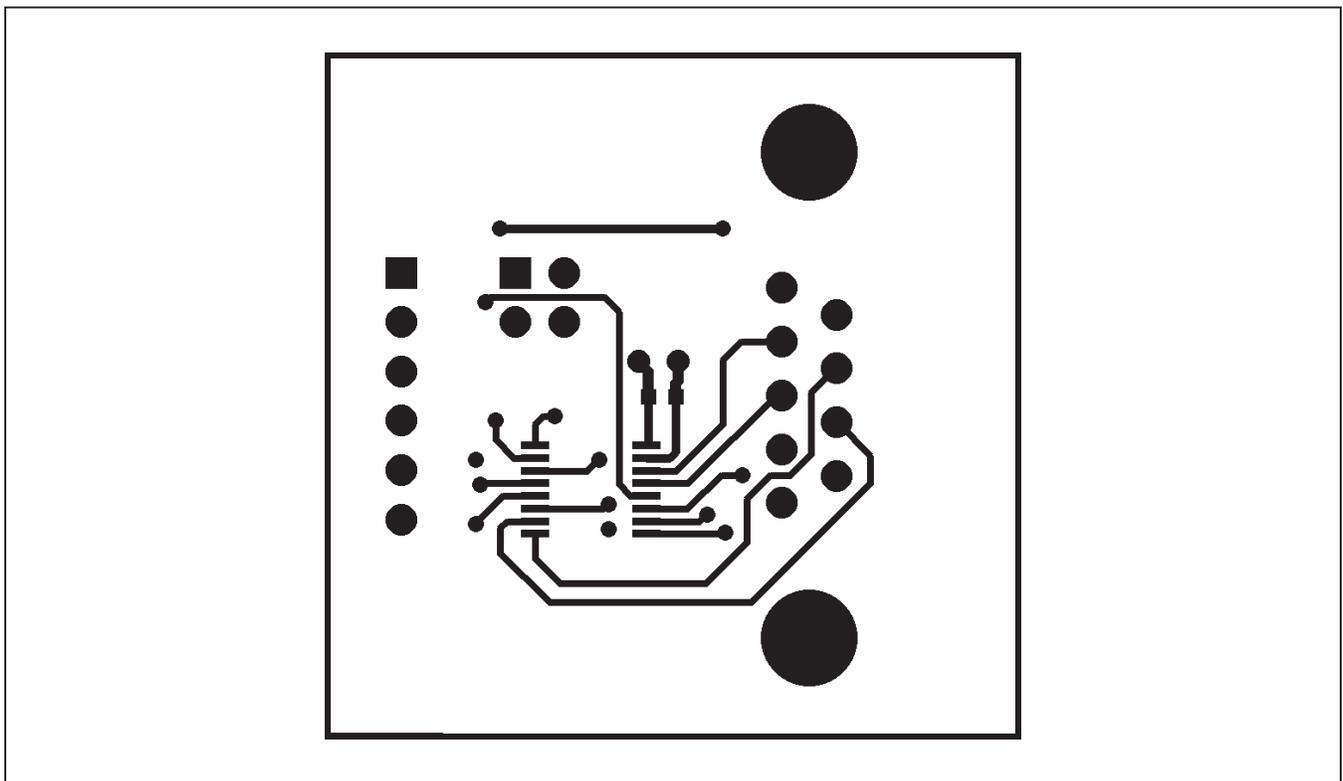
MAX3232PMB1 Peripheral Module PCB Layout—Component Side
